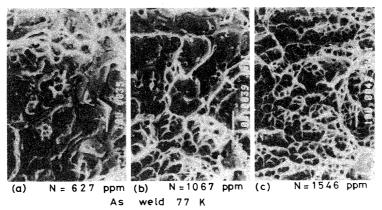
Change in the fracture morphology of weld metal tested at 77K with nitrogen content. (N<2000 ppm)
